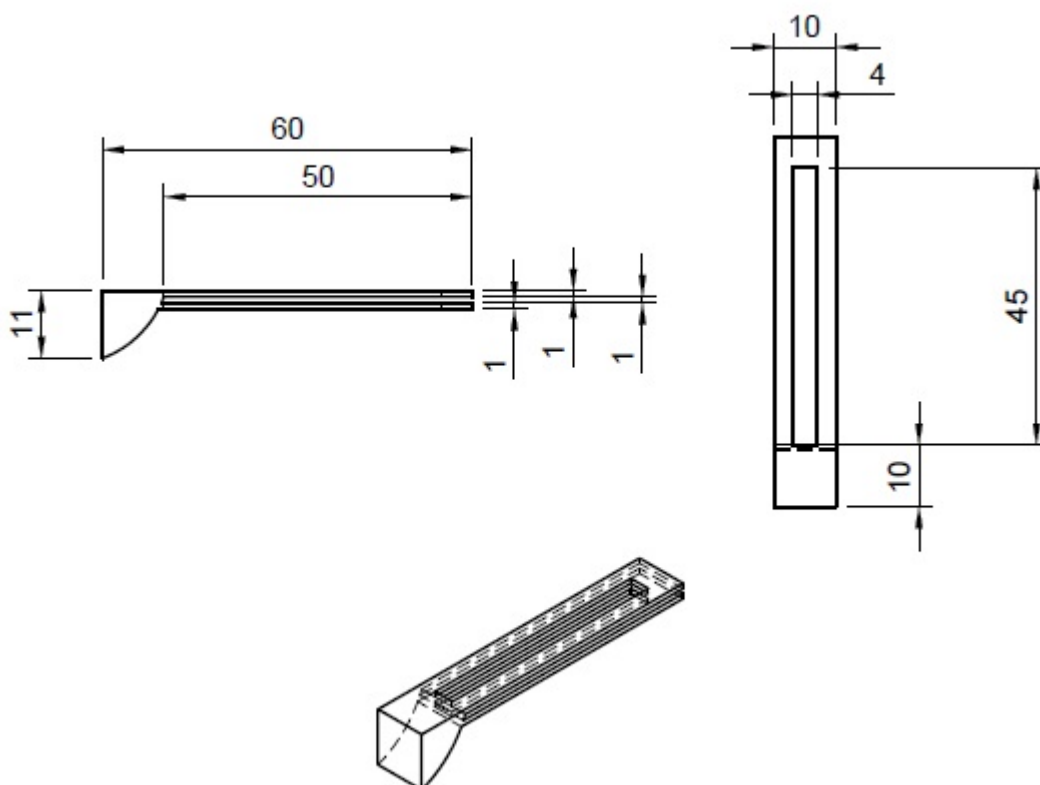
Drawing of the arm part attached to the flange. This part is made out of SS316. The length of adjustable part is 50 mm and thickness of the plates is 1 mm with a 1 mm gap in between them for insertion of the part shown on Fig. 3.14.
